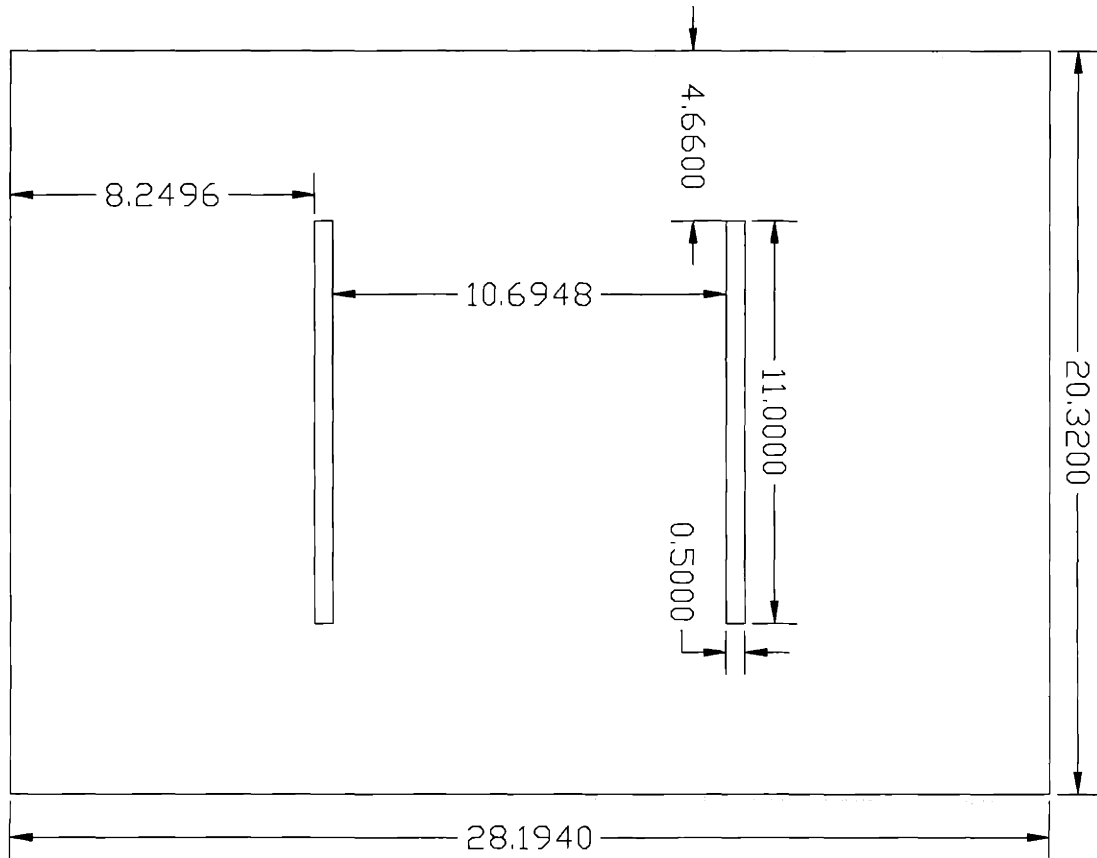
Scale-up microreactor drawing showing channel locations. Drawing units are in millimeters.
